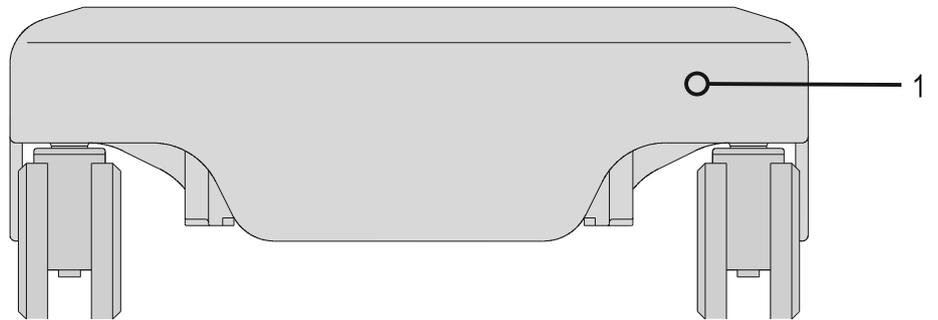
Base Platform, 2 Swivel Caster with Brake, Front View
